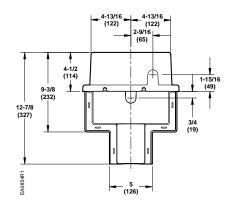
Dimensions of 599-10071 SKD Weather Shield in Inches (Millimeters).
